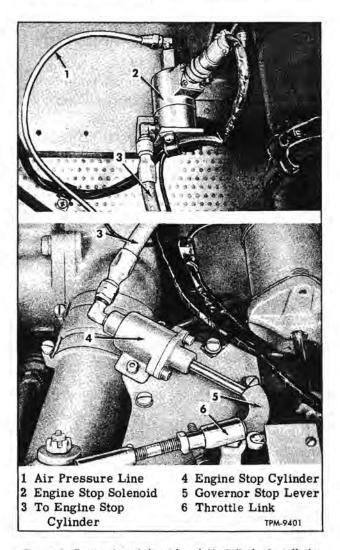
Engine Stop Solenoid and Air Cylinder Installation
